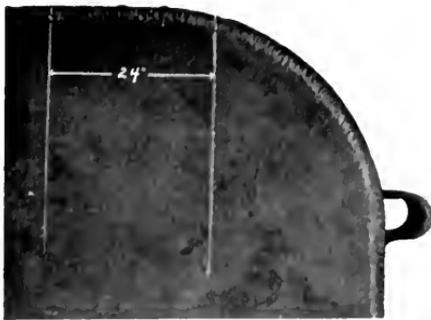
Near View of Arc Weld in Base of Large Tank
